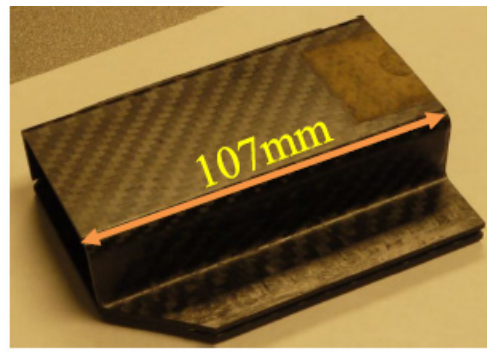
Geometry of the bonded crush tube sections. The dimensions of the part are in mm.
